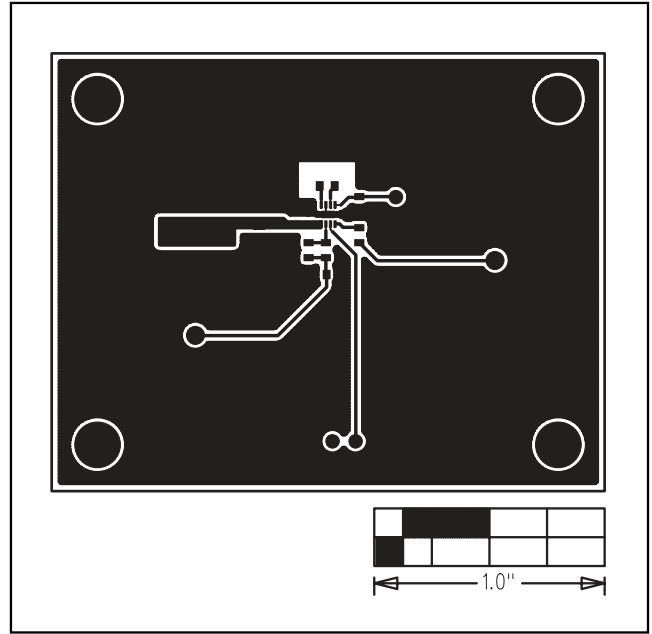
MAX9509 EV Kit PCB Layout—Component Side
